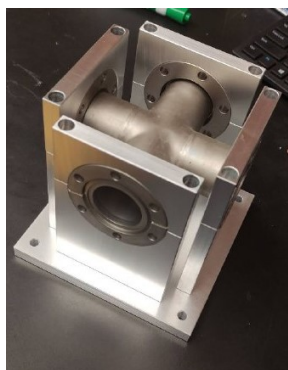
Cross holder for the MOT designed and machined with the help of Chris Secord.
